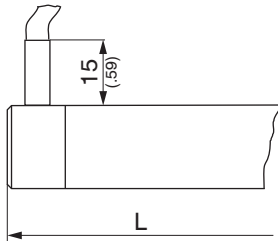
Displacement sensor type - CR with integral cable (radial)
